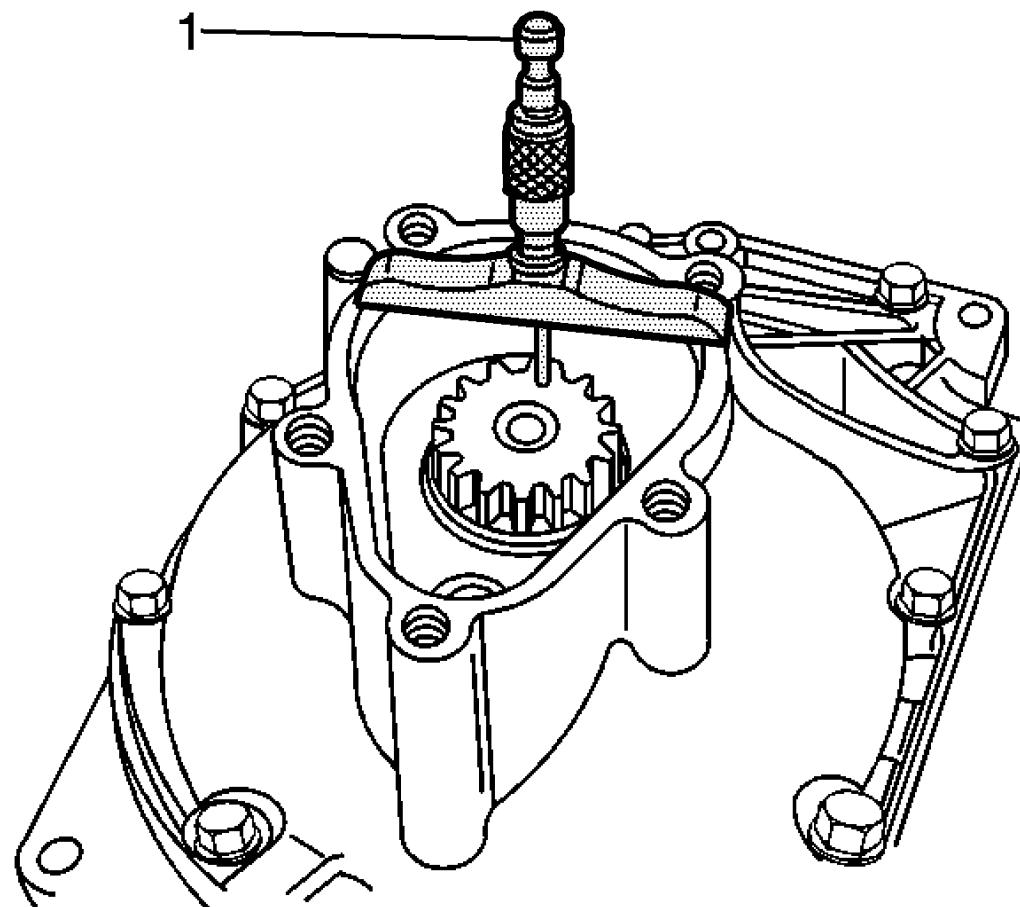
Measuring Differential Carrier Housing Machined Surface To Front Drive Axle Clutch Shaft Outer Surface
